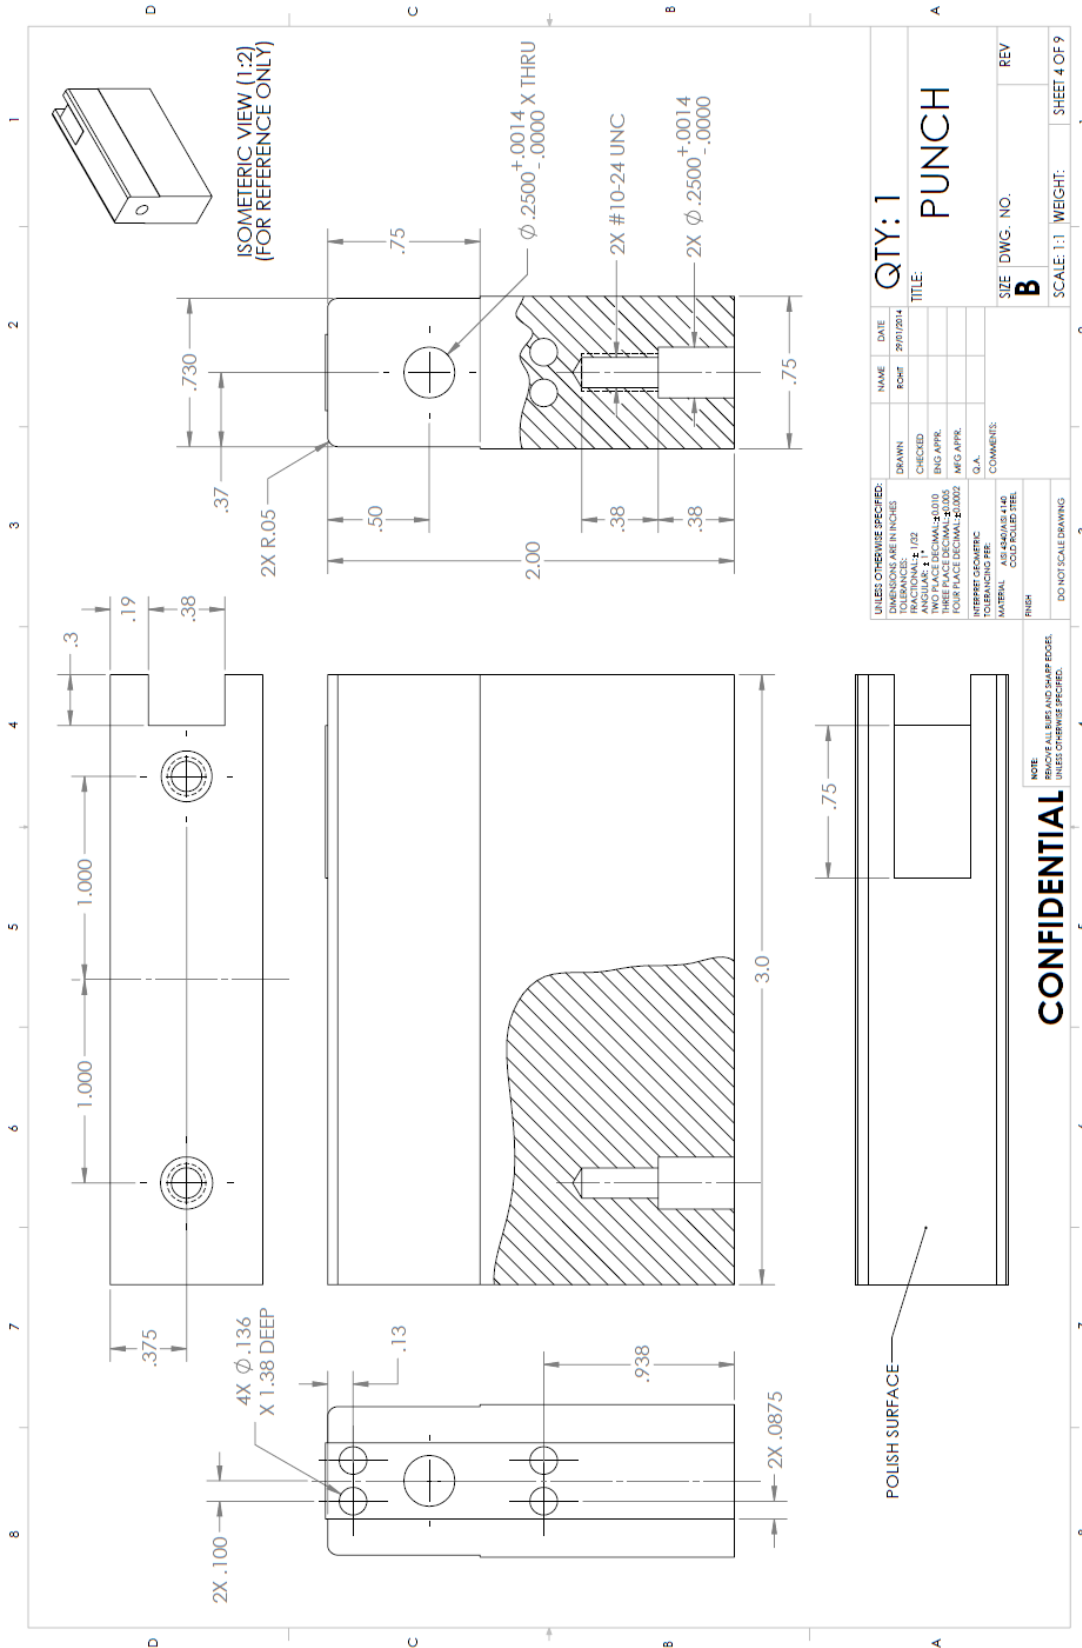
Detailed drawing of the punch used in the comprehensive springback study.
